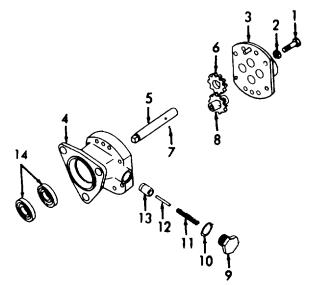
Fuel Pump, Disassembly/Reassembly.
